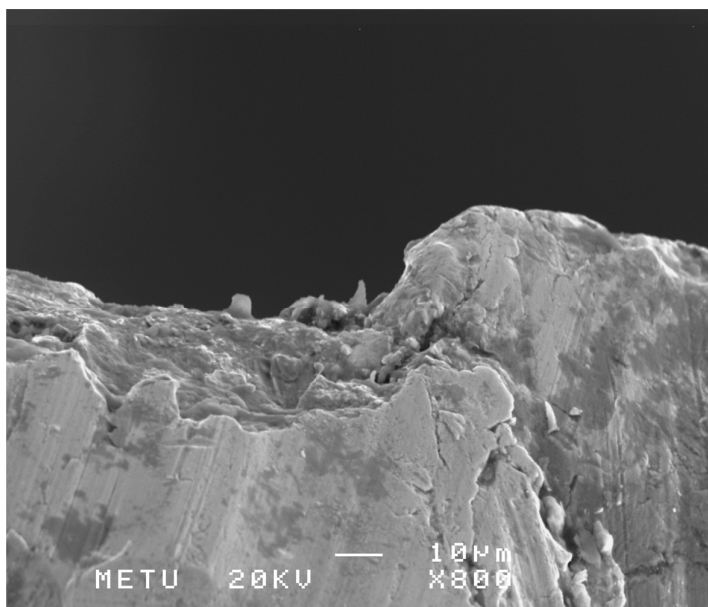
Fractograph showing the crack initiation region, X800 (EN-GJS 800-2 crankshaft rolled at 15kN).
